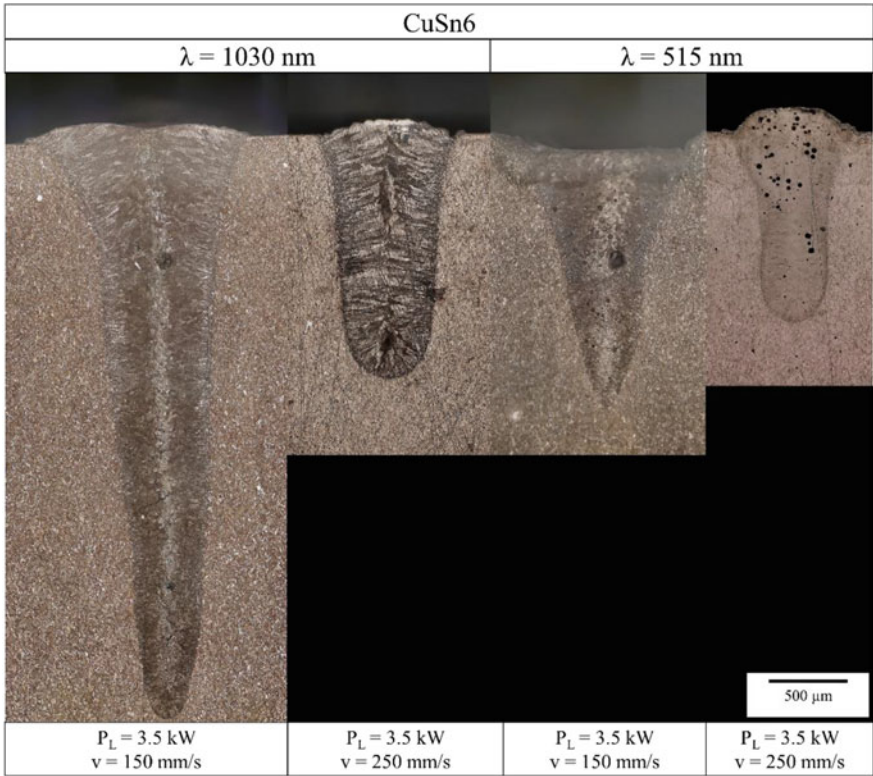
Weld seam cross sections of CuSn6 for 1030 nm laser (left) and 515 nm laser (right)
